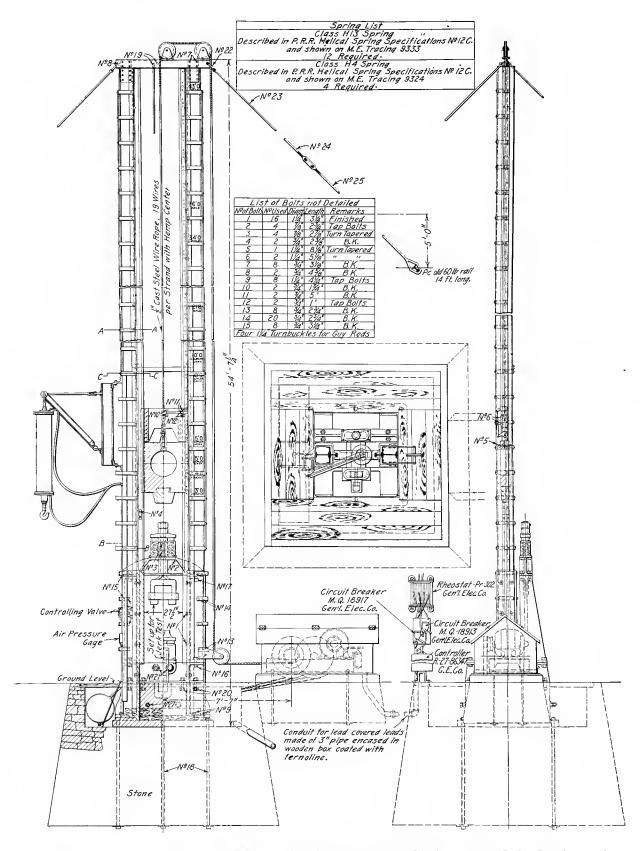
General Arrangement for M. C. B. Standard Drop Test Machine for M. C. B. Couplers and Axles. (M. C. B. Sheet 29.)
